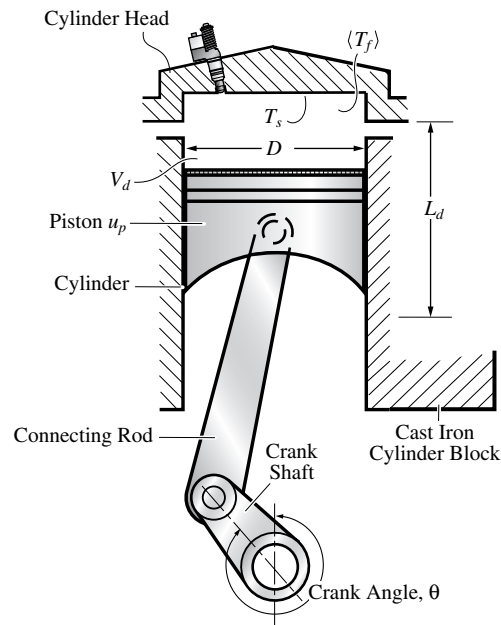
Geometric parameters of the cylinder in a diesel internal combustion engine.
